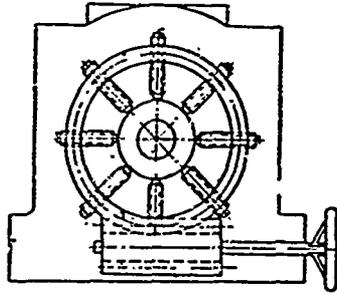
Riffling machine lunette E with worm-type spacing mechanism (see Fig. 123)
